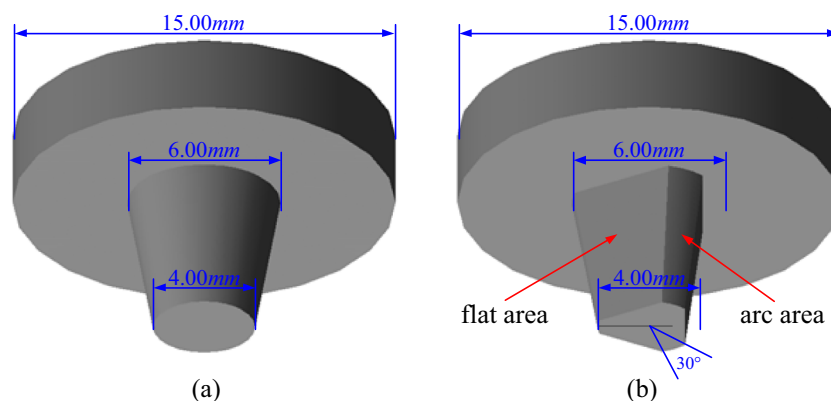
Schematic sketch of tool profiles: (a) conical tool (CT) and (b) triflat tool (TT).
